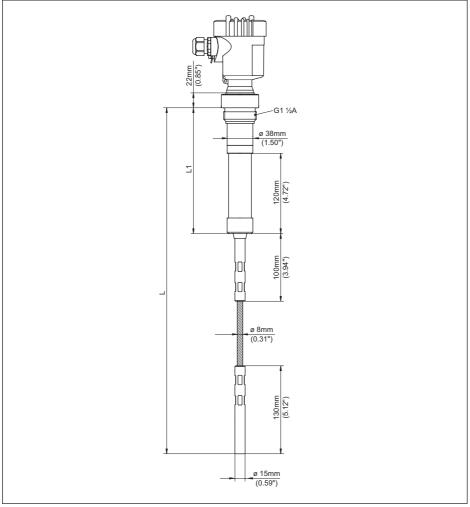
VEGACAL 67, ceramic insulated cable probe with crimping sleeve / -50 ... +350 °C 5/
